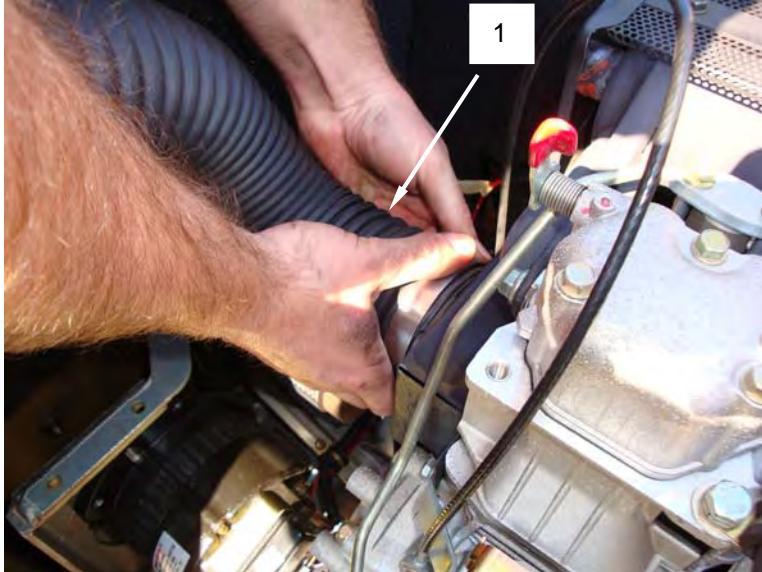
Remove Engine Head Cooling Air Inlet Hose.
